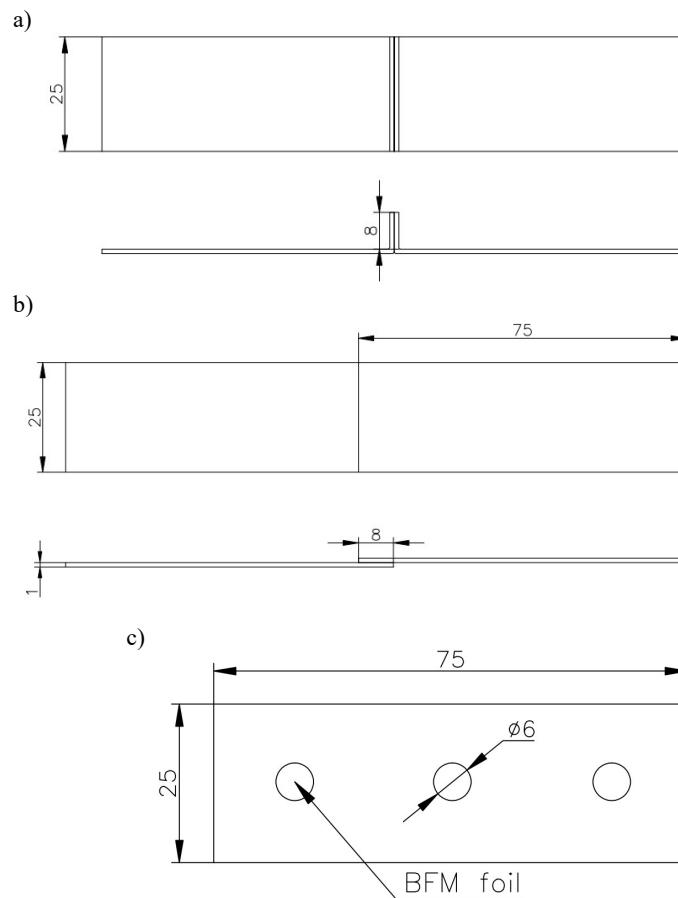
Samples used for (a) static tensile tests, (b) peel test, (c) spreadability test. All dimensions given in millimeters
